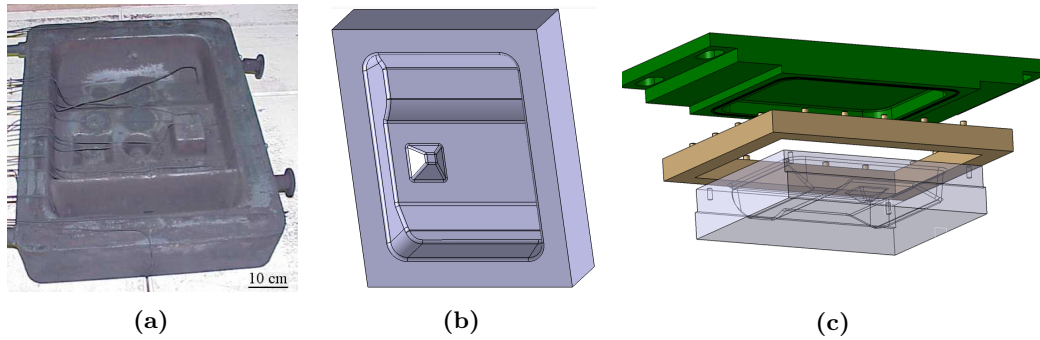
Prototype tooling: (a) initial geometry, CAD views of (b) the modified mold and (c) the entire SPF dies assembly
